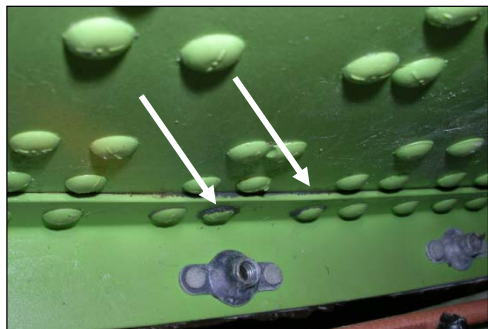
Signs of movement in a riveted joint, in aircraft S/N 343
